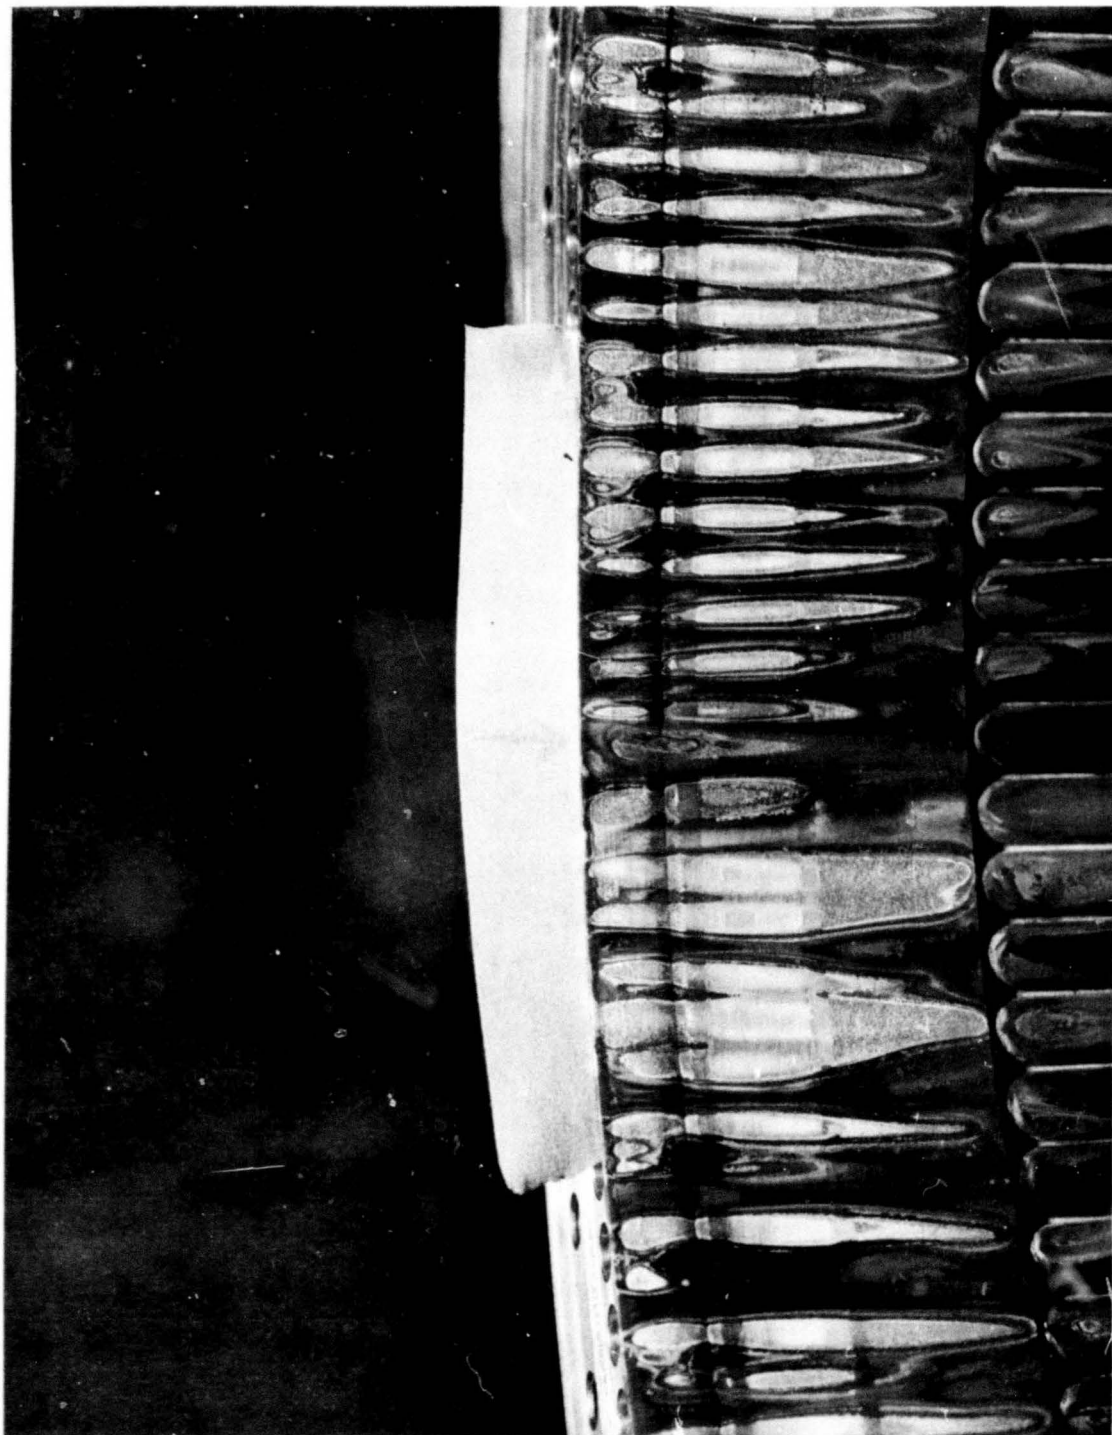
Combustion Chamber S/N 007 -- Mounting Flange Erosion
